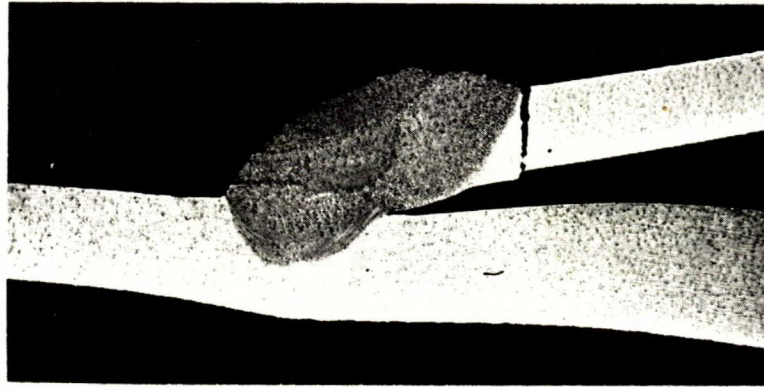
Section through 1/8 in. long crack indication found by penetrant inspection. The crack has started at the toe of the weld with the connecting tube in Sample C on the side such as shown in Figures 4 and 19 for Samples A and B respectively.
